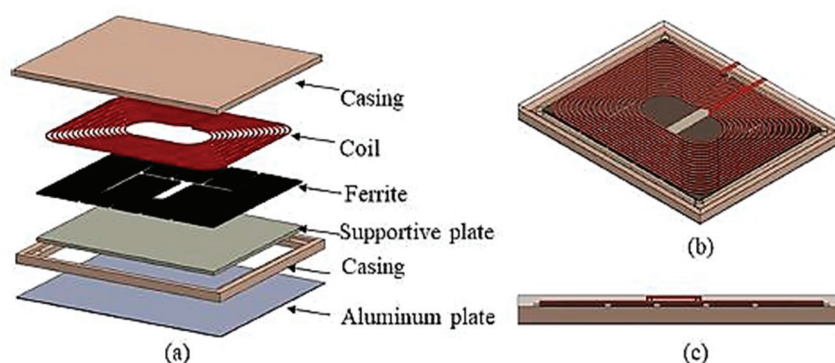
Embedded IPT pad with its components: (a) exploded view, (b) isometric view, (c) cross-section [30].
